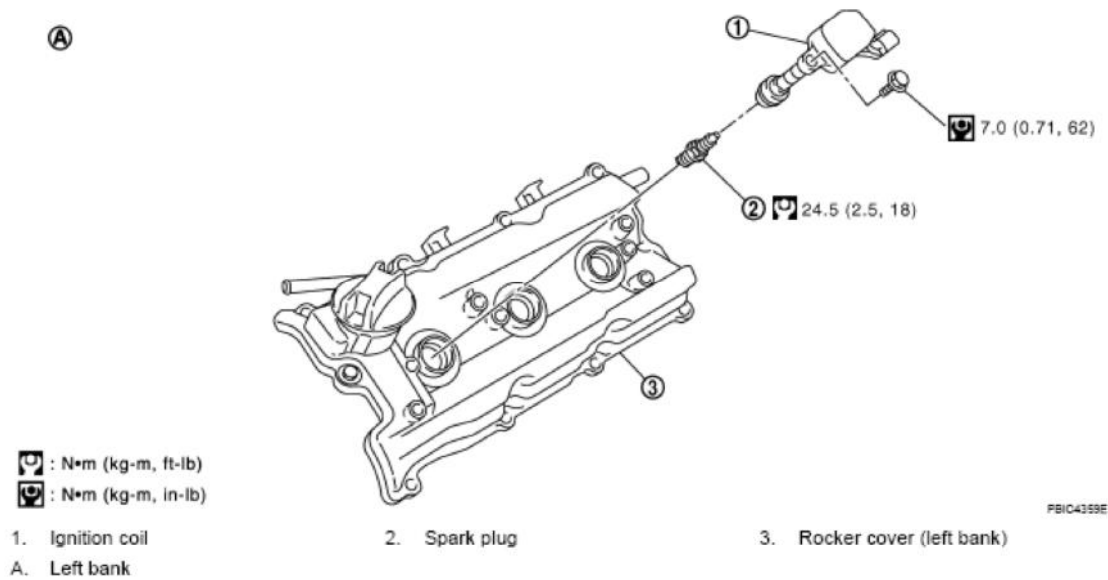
Identifying Spark Plug Components With Torque Specifications (Platinum-Tipped Type)
